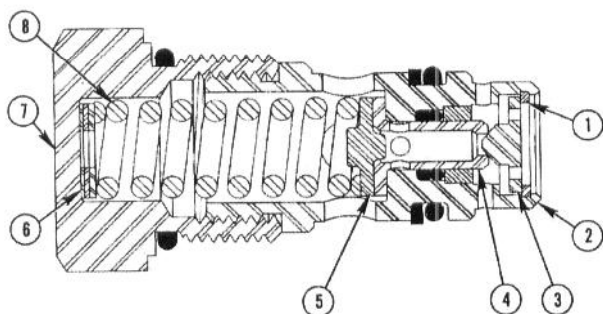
Cutaway Typical of "32042" Relief Valve
